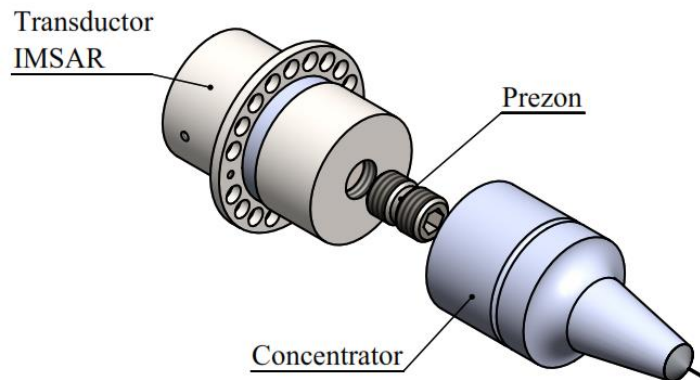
Assembly of the transducer with the concentrator using a bolt
